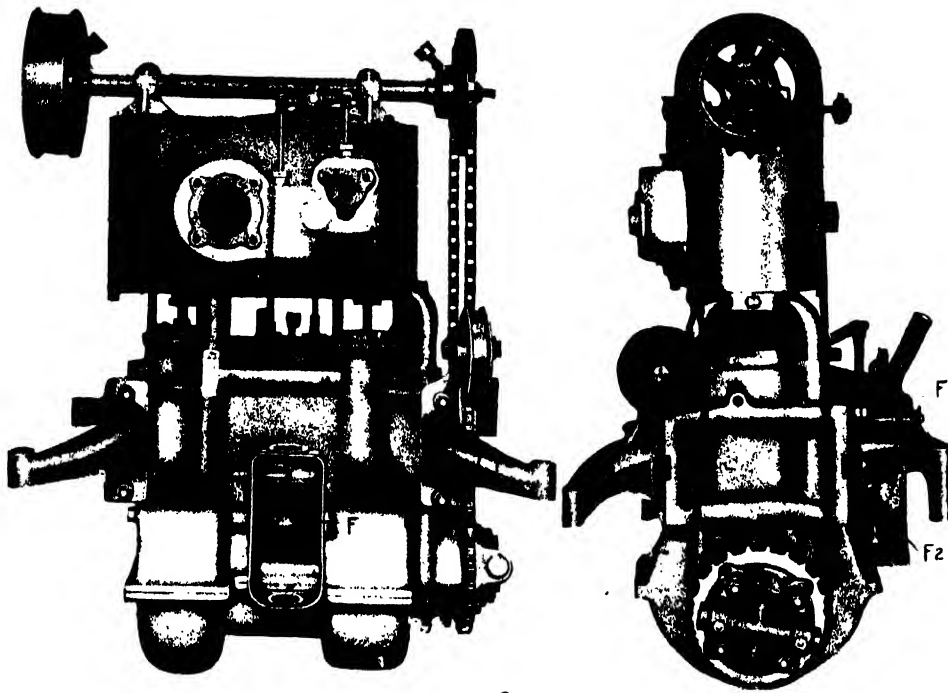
30-H.P. White Steam Car Engine. Side and End Elevations
